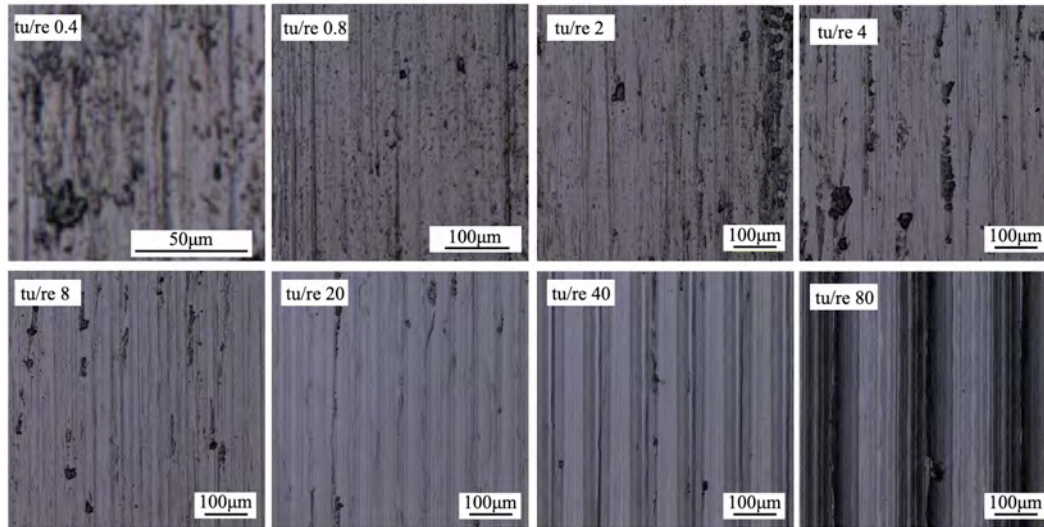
Machined surface morphology at cutting speed 30 m/min after cutting 60 s for different tu/re .
